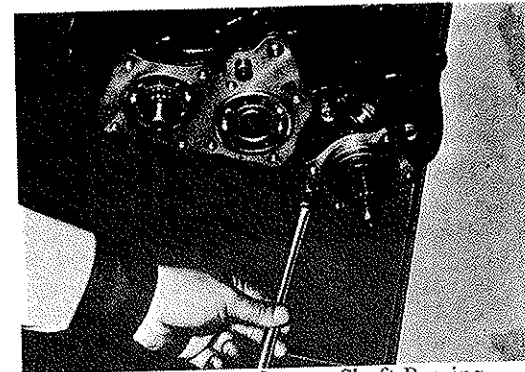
Installing Output Shaft Bearing Rear Retainer
